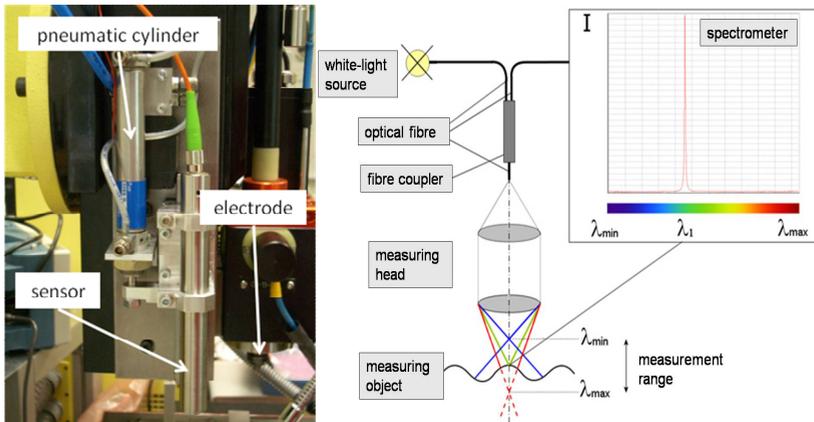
Confocal white-light sensor on the micro-EDM-milling machine (left), measurement principle (right)
